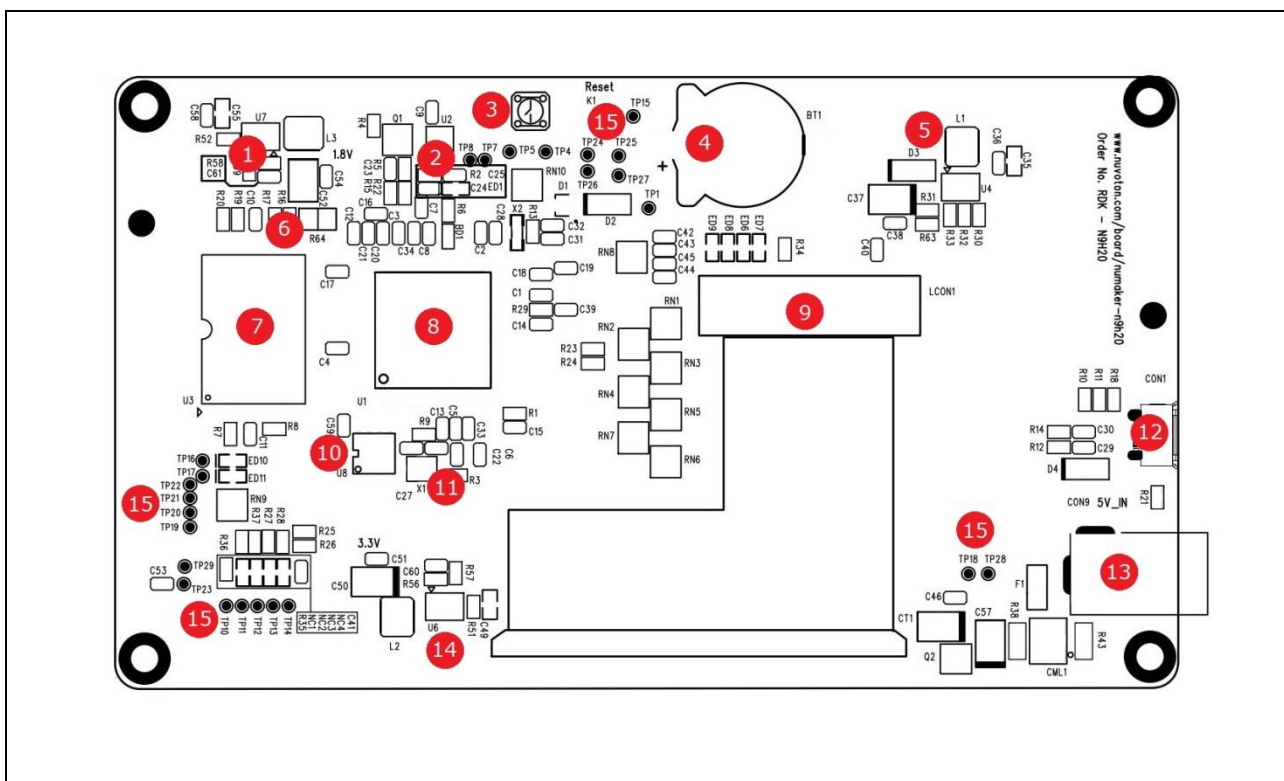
NuMaker-emWin-RDK-N9H20 PCB components side
